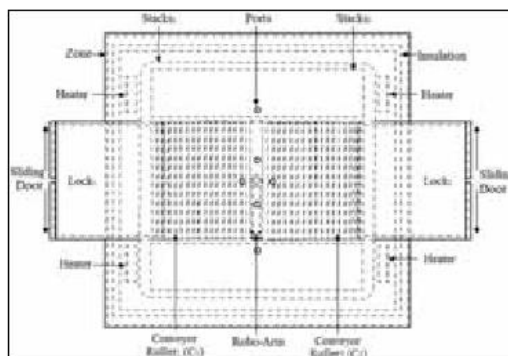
Top View of Single Cylindrical Zone with a Lock on either side
